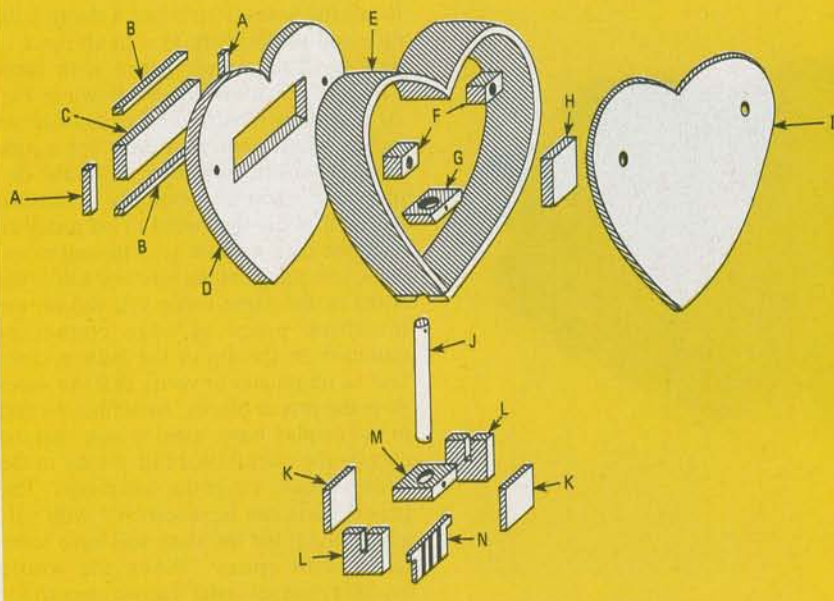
EXPLODED VIEW of the heart-shaped display case and its connector. The dimensions are given in Table 2.
